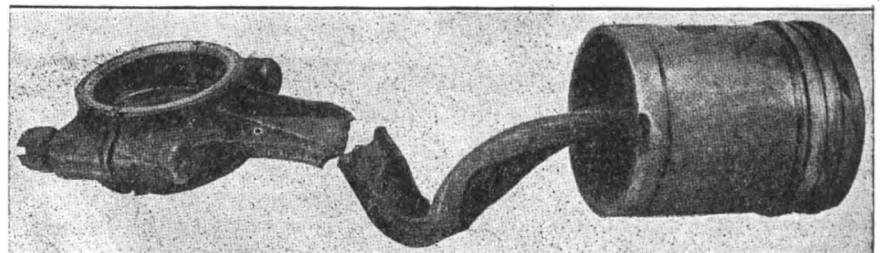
THIS BROKEN CONNECTING ROD RESULTED WHEN THE PISTON SEIZED AT HIGH SPEED, BECAUSE THE LUBRICATING OIL HAD BEEN TOO GREATLY DILUTED WITH FUEL. NOTICE THE LOWER BEARING IS STILL IN PERFECT CONDITION.
